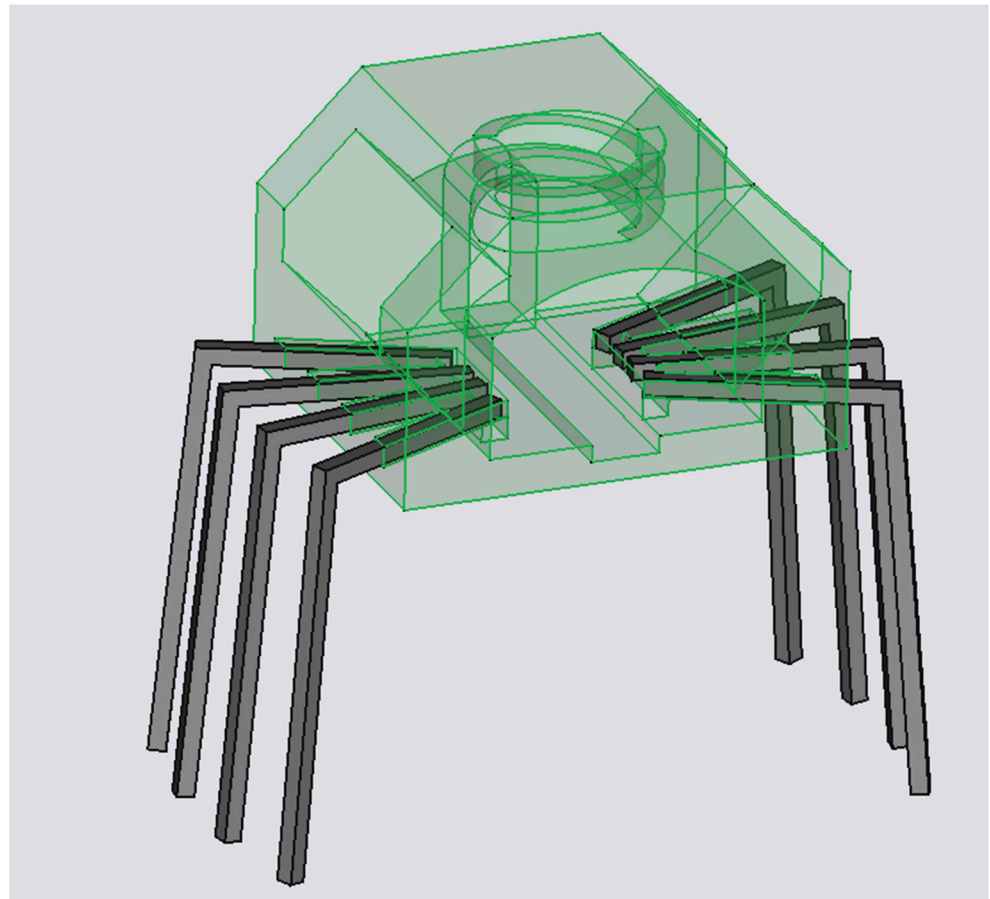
Partially assembled CAD for the device with a semi-translucent enclosure part.
